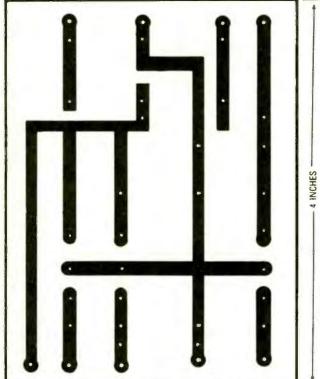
This foil trace pattern, if used properly, will beautify the circuit layout of the box and simplify wiring.
